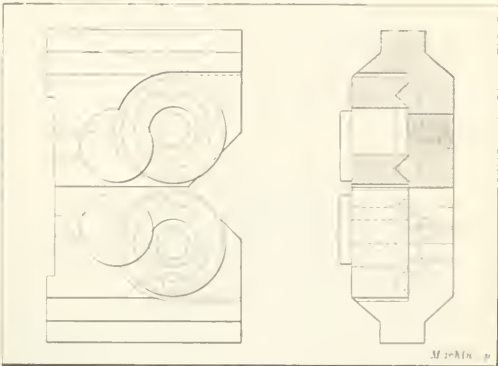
One of Three Styles of Roller Follow-rests for Use on J. & L. Turret Lathes
